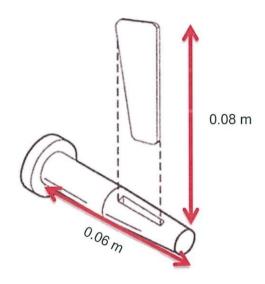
Stub Pin Source: architectjaved.com (n.d)
